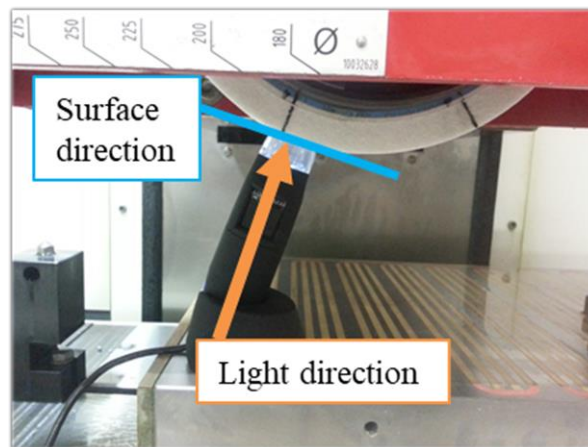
Optical microscope set on grinding machine. Light direction is perpendicular to wheel surface in order to apply coaxial light technique.
